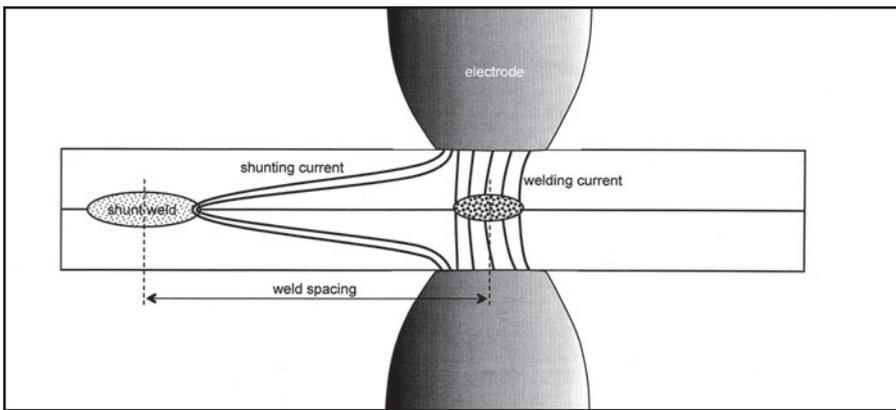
Schematic of shunting in welding (adapted from Fig. 2.6 of Zhang and Senkara, Ref. 2).
